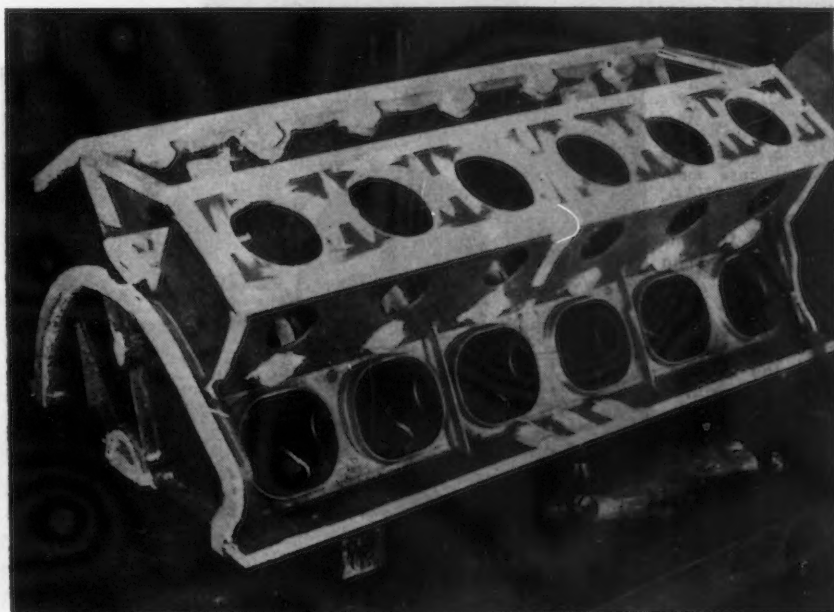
Twelve-cylinder diesel crankcase, 6½ in. bore and 7½ in. stroke.
